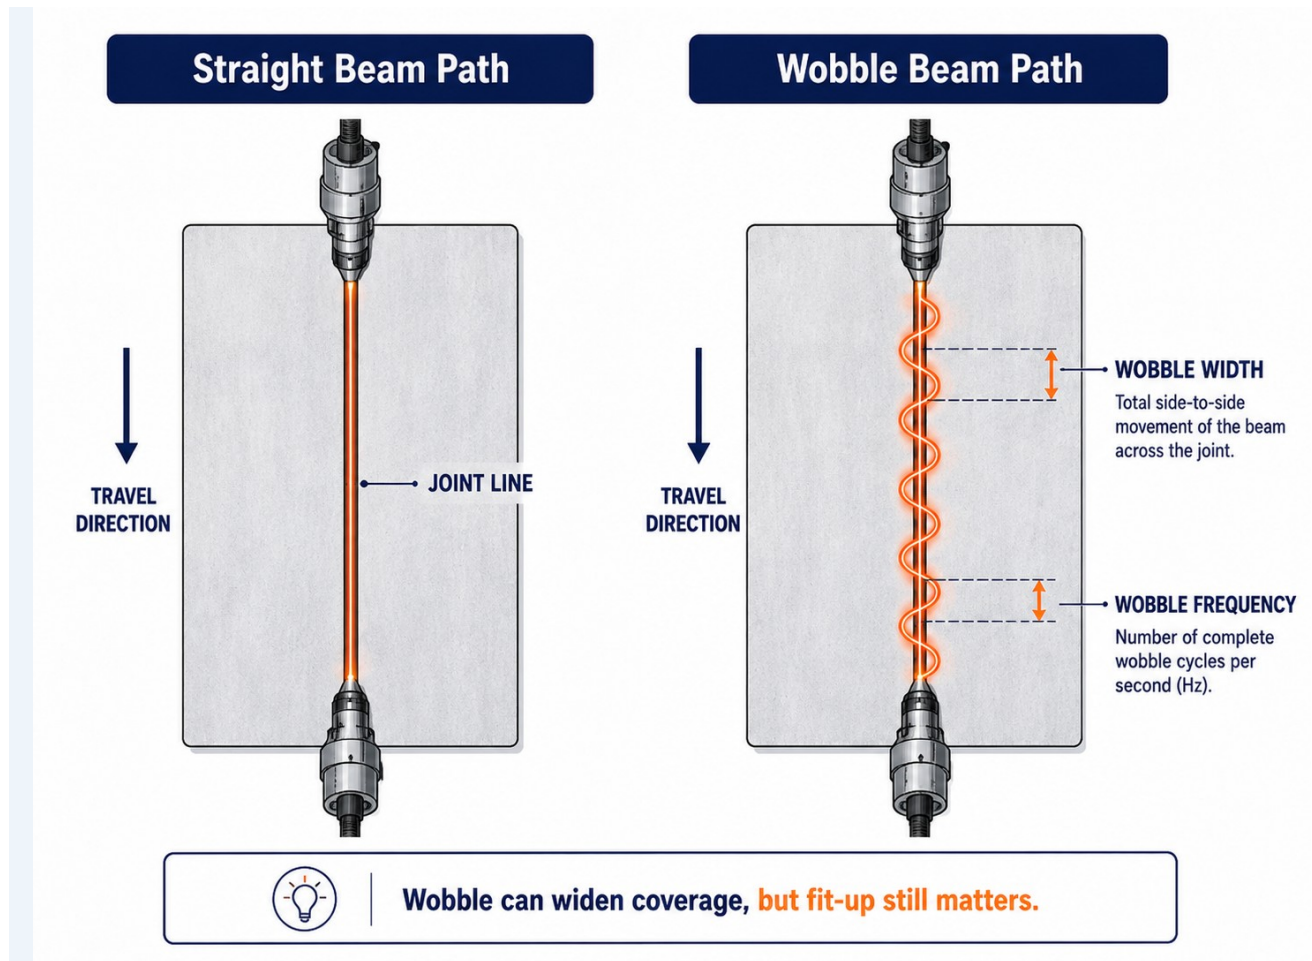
Straight and oscillating beam paths. Wobble width and frequency change how the beam covers the joint.
